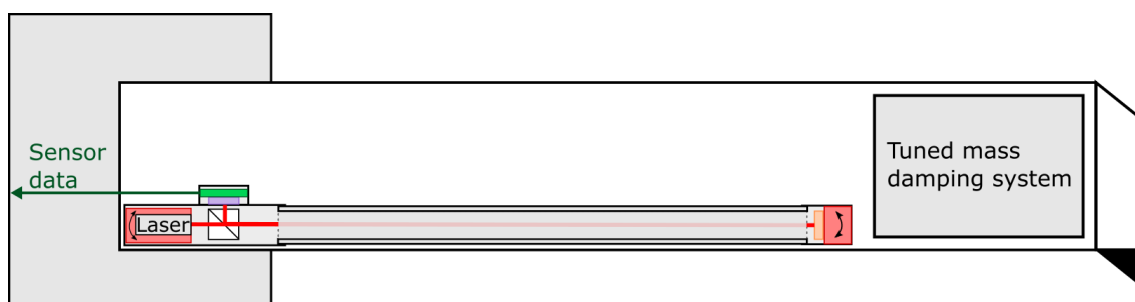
Idea of how the test setup can be used in a cutting tool. The test setup must be mounted so the pipe follows the curvature of the cutting tool.
